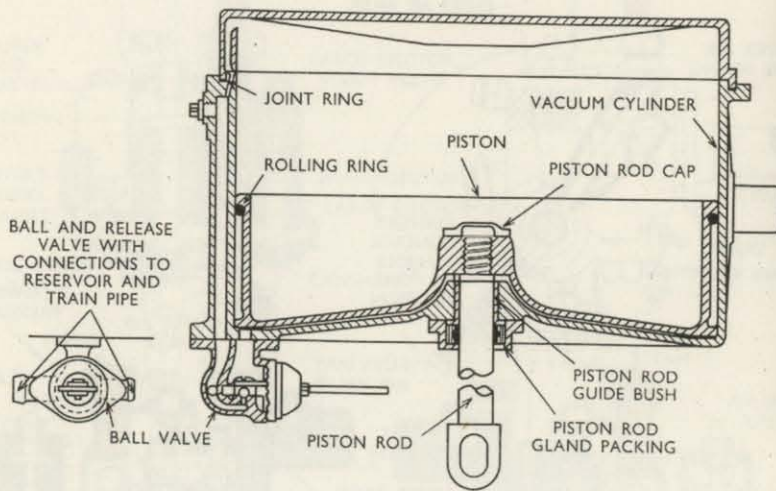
VACUUM BRAKE SEPARATE CYLINDER
